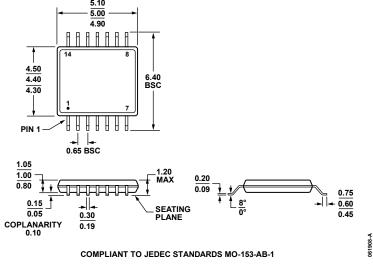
14-Lead Thin Shrink Small Outline Package [TSSOP] (RU-14) Dimensions shown in millimeters
